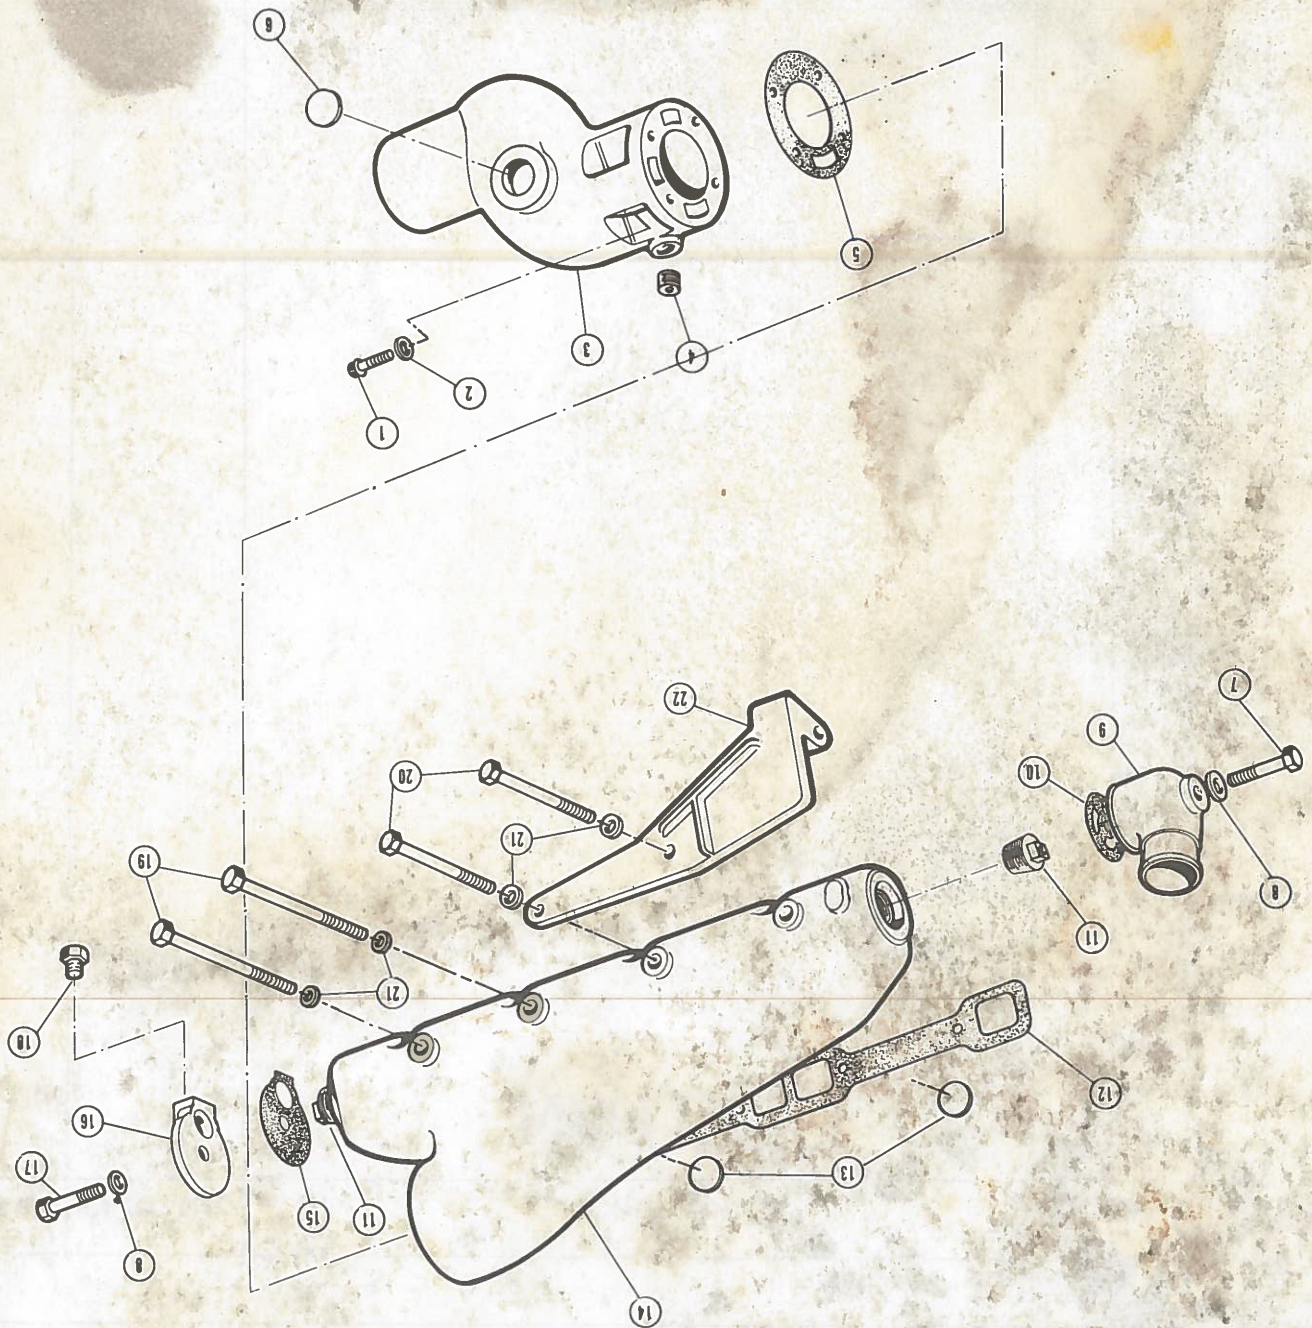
EXHAUST MANIFOLD ASSEMBLY
